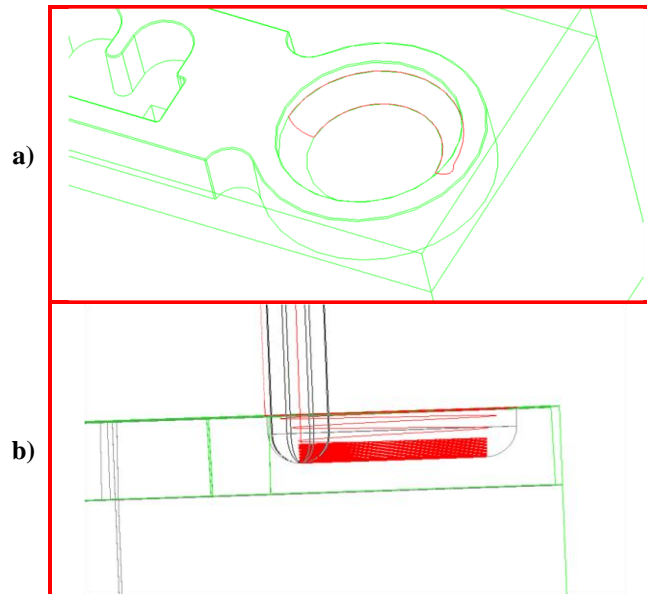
The simulation of machining of a spherical surface: a – a choice of the machined surface; b – the trajectory of the cutting tool for the fifth machining step.
